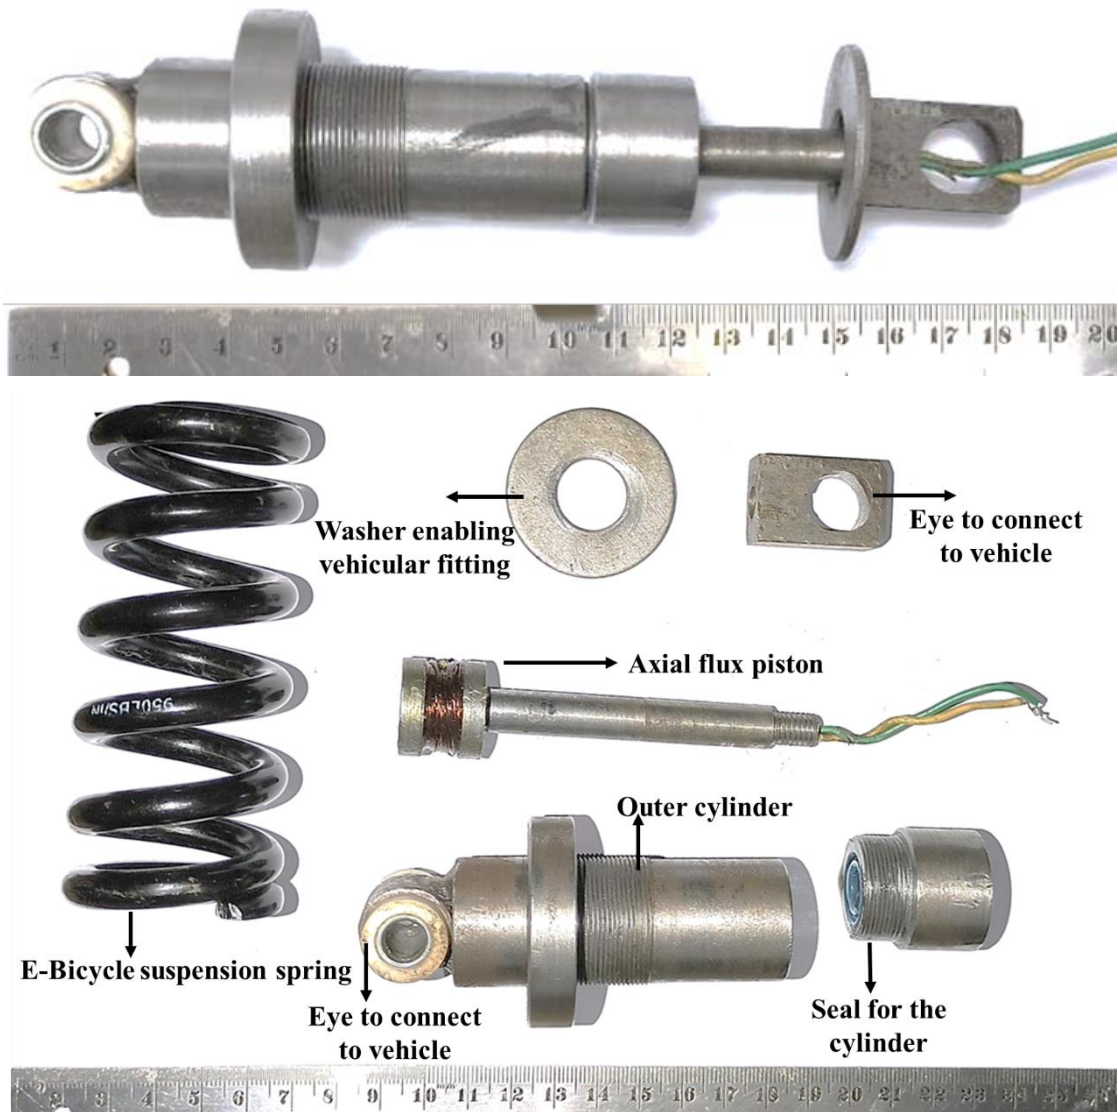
Assembled and disassembled view of axial flux e- bicycle MR damper
